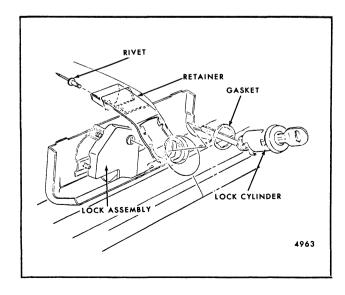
Typical Top Loading Lock Cylinder Retainer - Chevrolet "A" Style Shown
